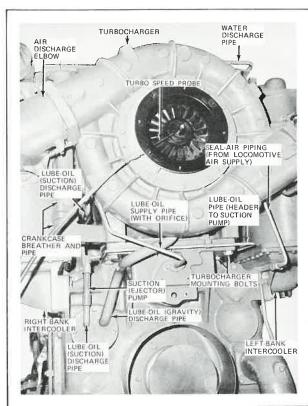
TURBO INSTALLATION DETAILS, COMPRESSOR END.
